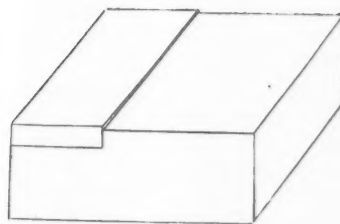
Electrode for welding tools showing sintered tungsten copper insert
